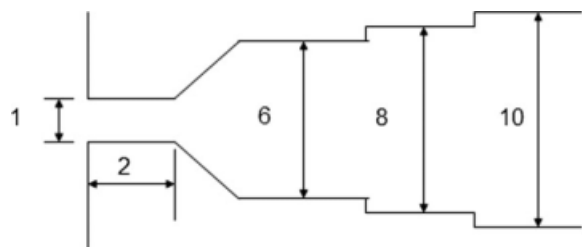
Geometry of the extrusion die (dimensions in millimeter).
